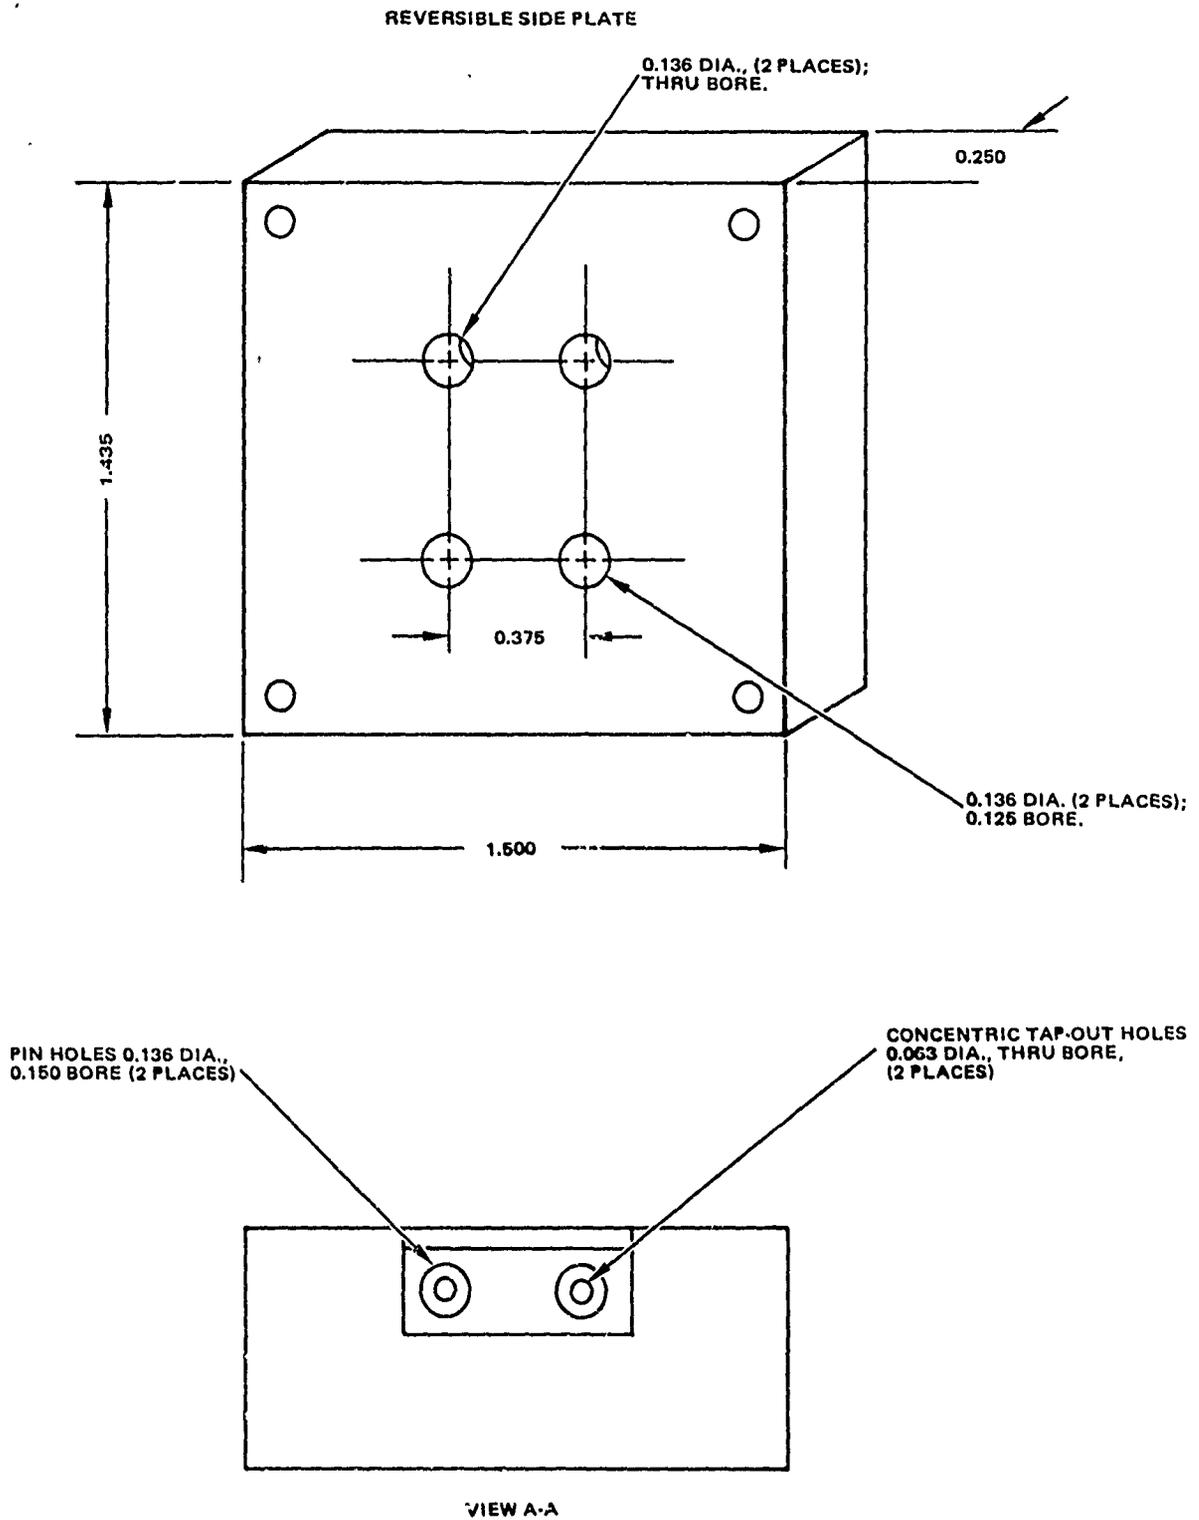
Dimensioned sketch of fabricated vacuum/pressure casting mold (sheet 1 of 2)
